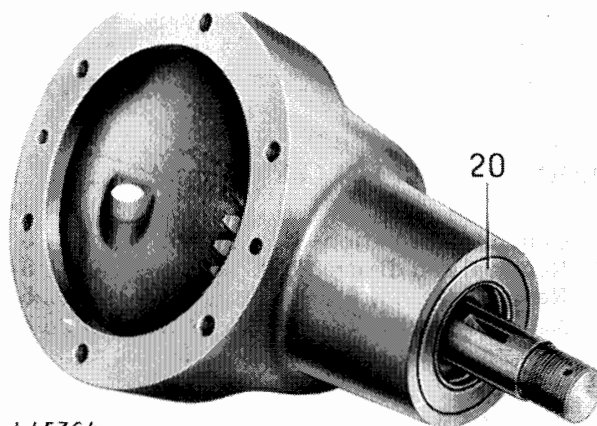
Removing Oil Seal from Belt Pulley Case
